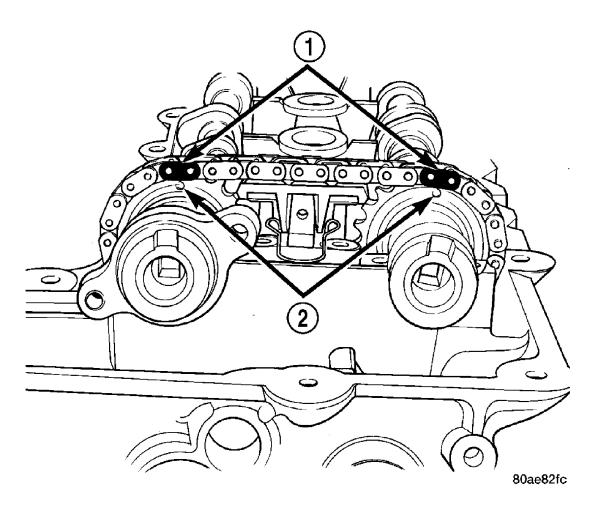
Identifying Camshaft Chain Timing Courtesy of CHRYSLER LLC
